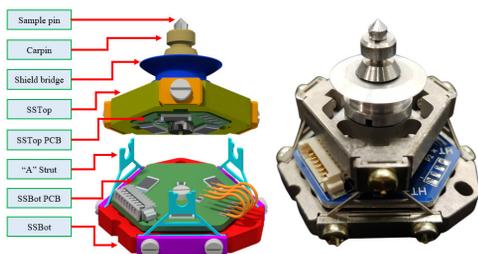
Left: overview of the sample holder with its main subcomponents. Right: picture of the assembly.
